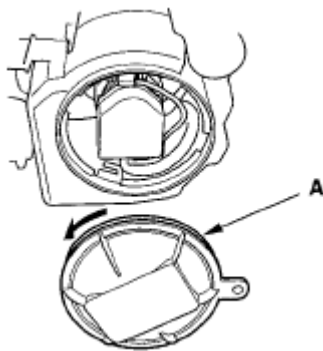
Identifying Cover To Removing From Headlight Assembly
